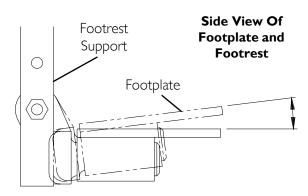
Adjusting Perpendicular and/or Inversion/Eversion Adjustable Angle Flip-up Footplate
